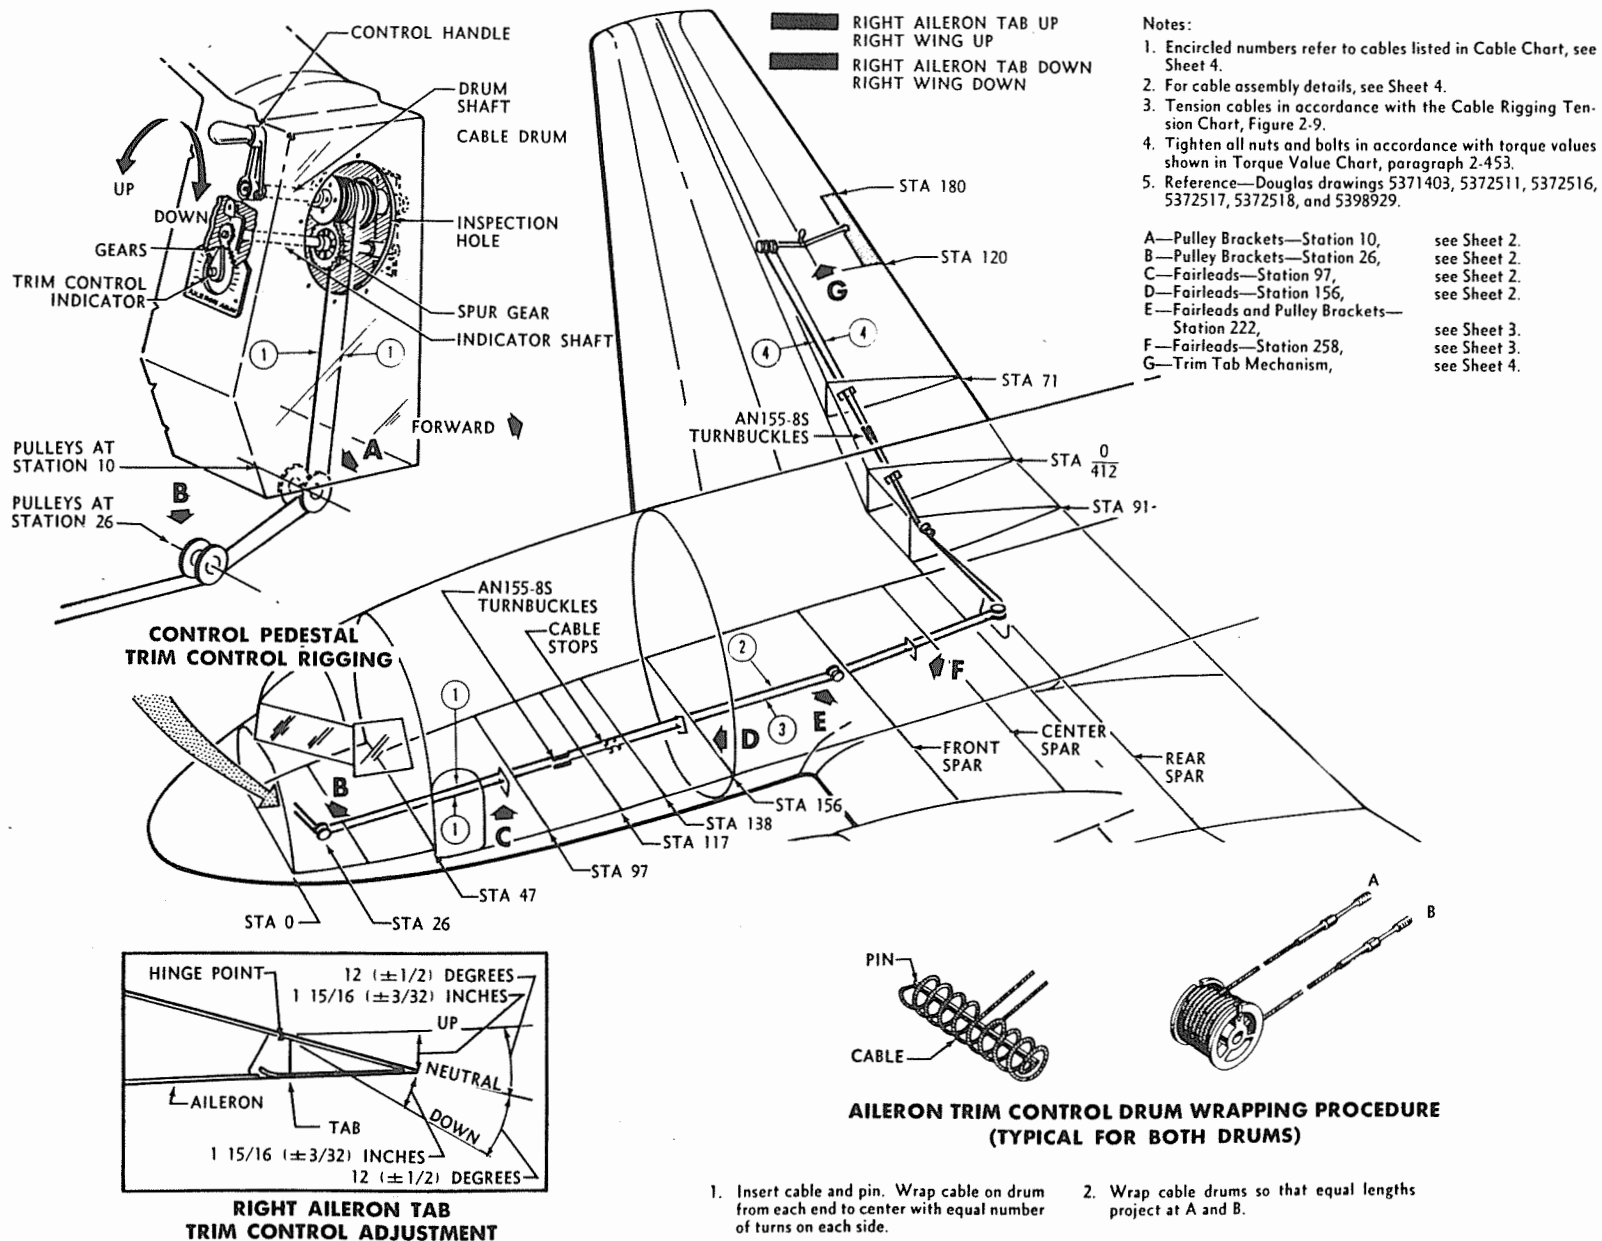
(Sheet 1 of 4 Sheets). Aileron Trim Control System - Key Drawing
